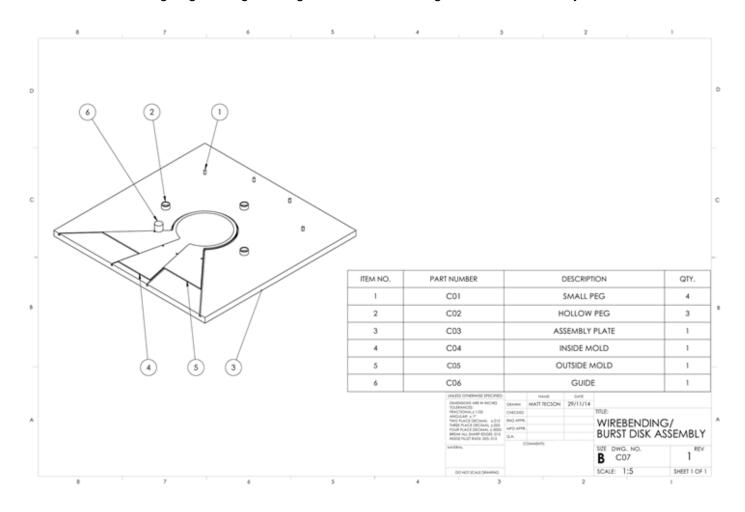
Wire Bending/Burst Disk Assembly Drawing
